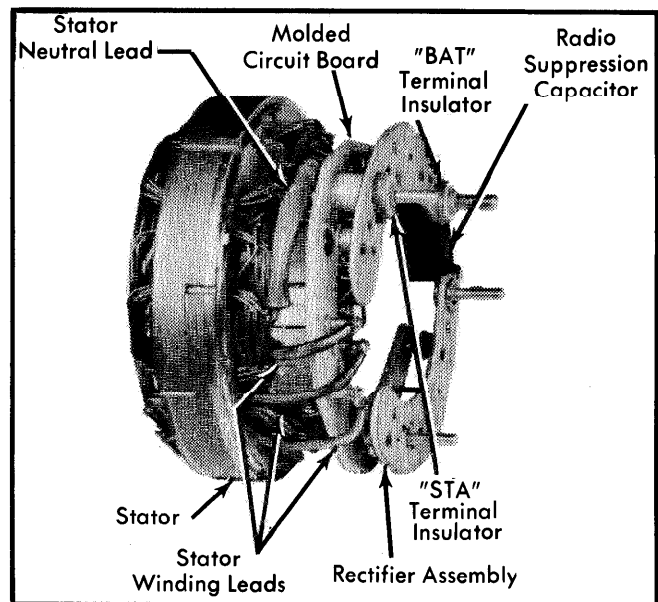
Stator Components and Lead Connections (Rectifier with Exposed Diode Shown)
